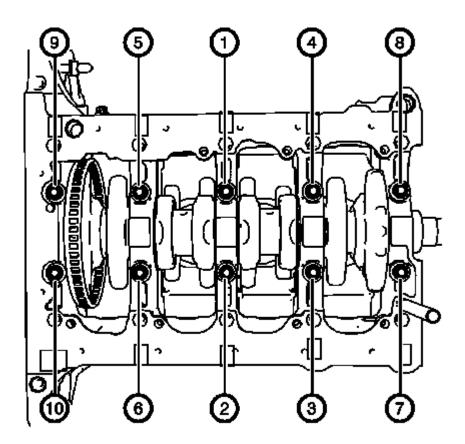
Crankshaft Bearing Cap Tie Plate Courtesy of GENERAL MOTORS COMPANY
